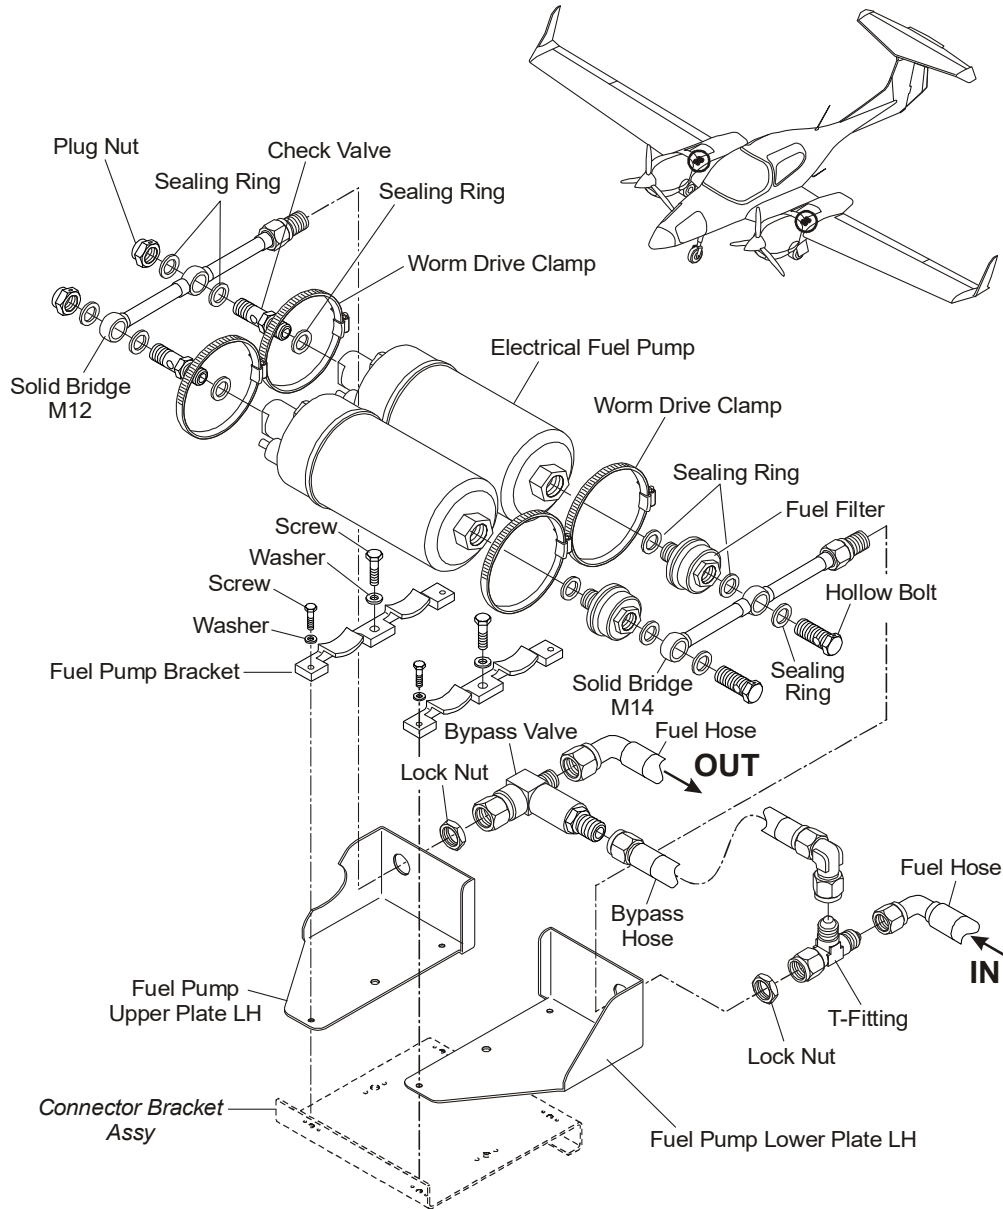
A: Fuel Pumps Assembly (if MÄM 42-1219 is installed)
